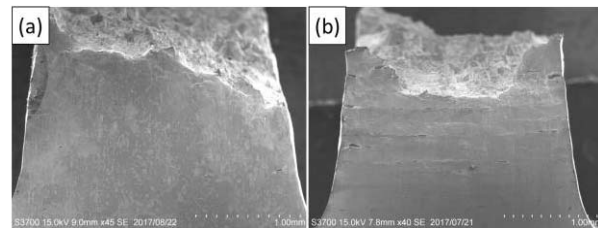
Fracture surfaces of as-built 90deg. specimens of (a) 67/67 block, (b) 90/90 block after tensile test at 650°C (side).
